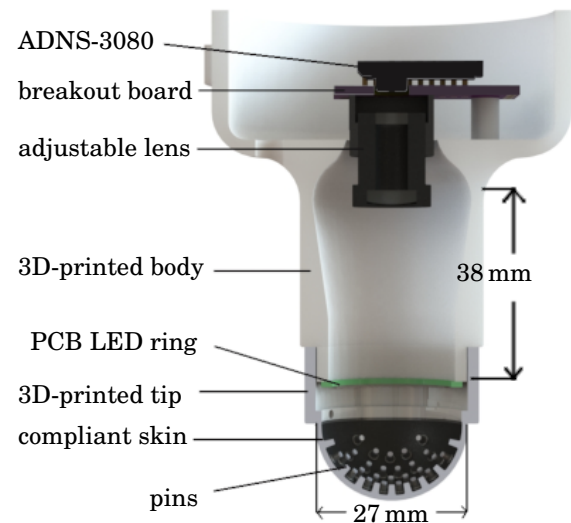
Computer modelled cross-section view of the sensor assembly. The two main components are (i) the 3D-printed body, housing the ADNS-3080 image tracking system and the PCB LED ring and (ii) the 3D-printed tip with a compliant sensing surface and pins.
